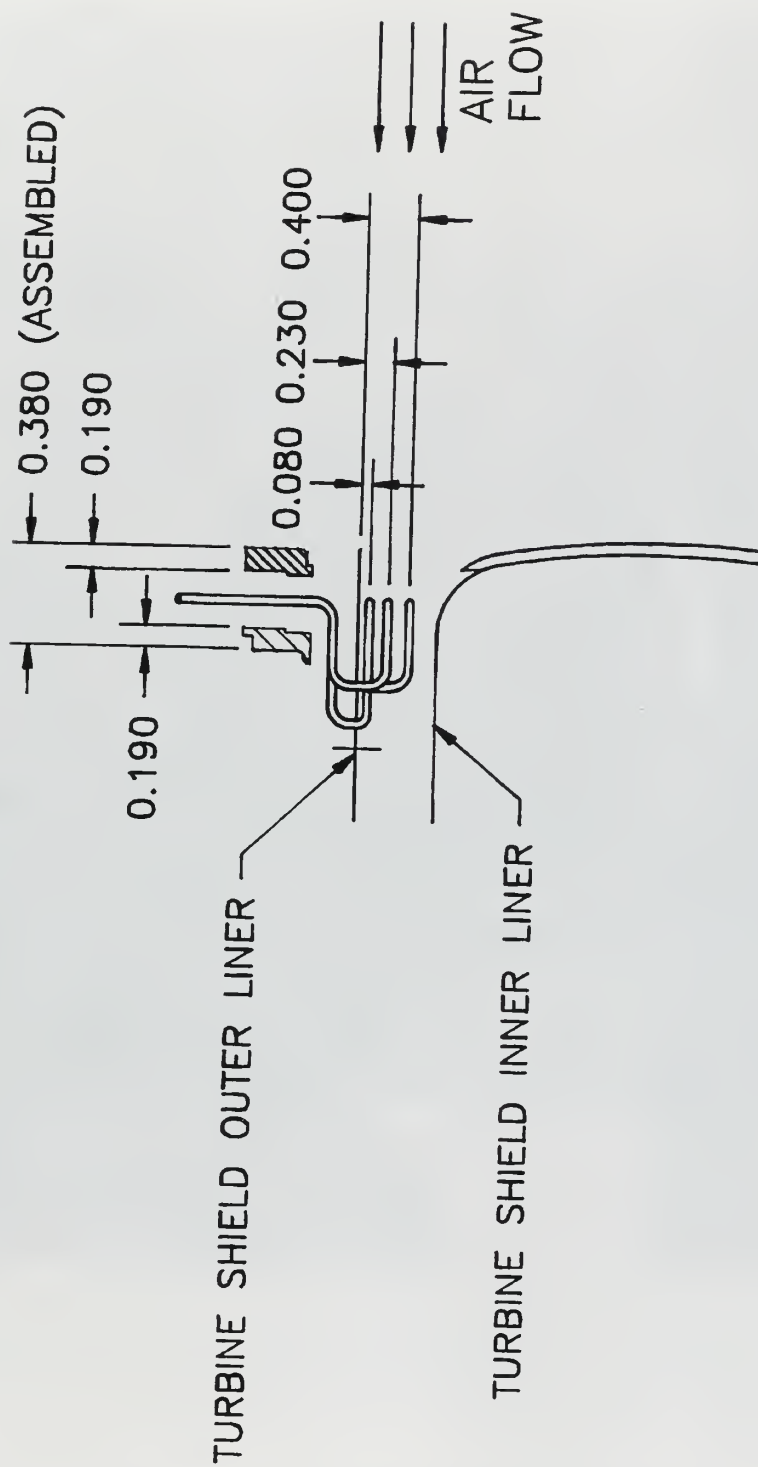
Side view of GGT inlet thermocouple ring assembly with thermocouple locations.
